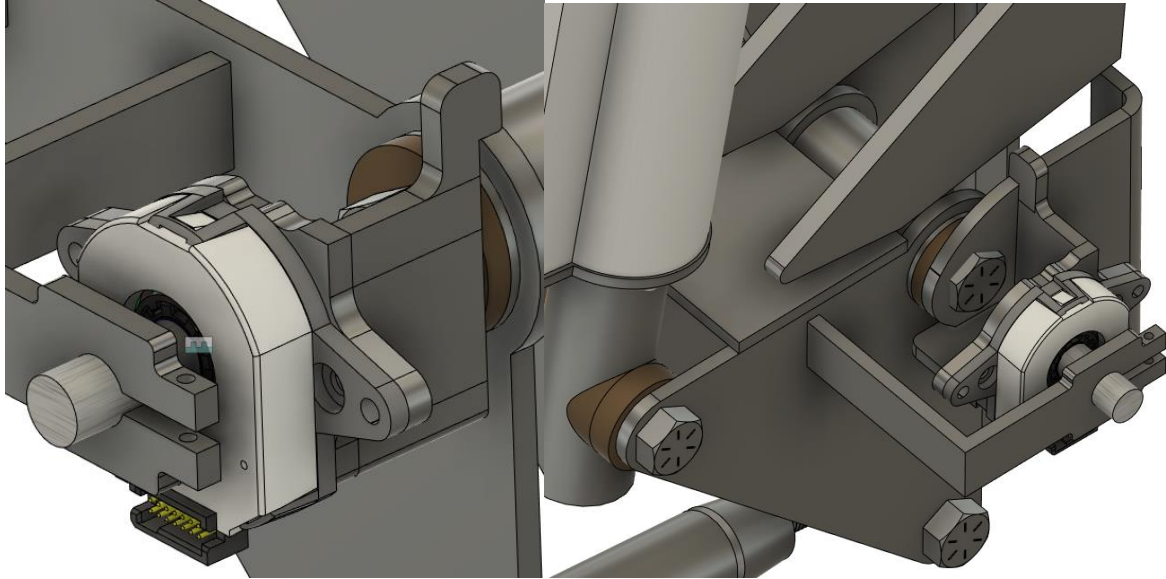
Virginia Motorsports' FSAE car's rotary encoder and encoder mounting.
